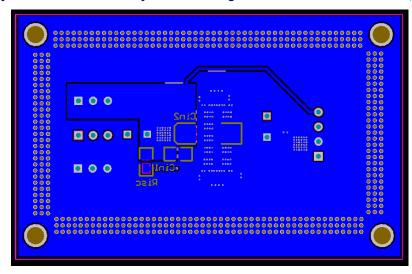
Layout of the board used by ST for the single event tests of the RHFL6000, bottom view
